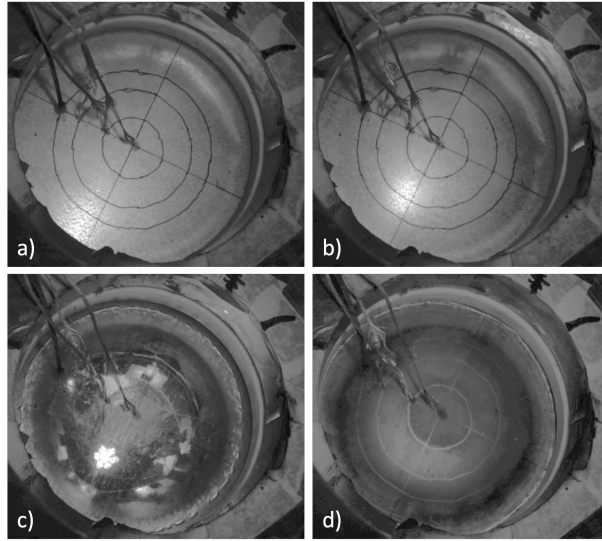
Evolution of the Usibor[®]1500P blank with Al-Si coating during the heating step of a bulge test: a) Initial conditions; b) 400 °C; c) 750 °C; d) 900 °C.
